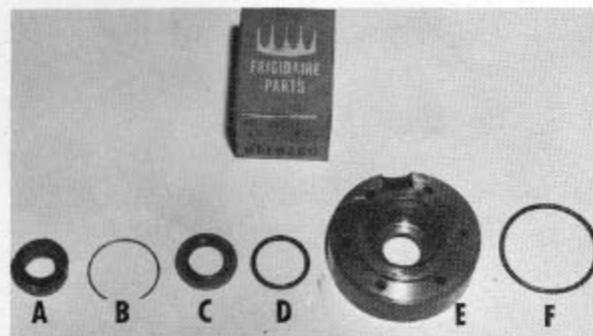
Seal parts: (A) Seal; (B) Seal plate retainer; (C) Seal plate; (D) Seal plate "O" ring; (E) Coil housing; (F) Coil housing mounting flange "O" ring.
